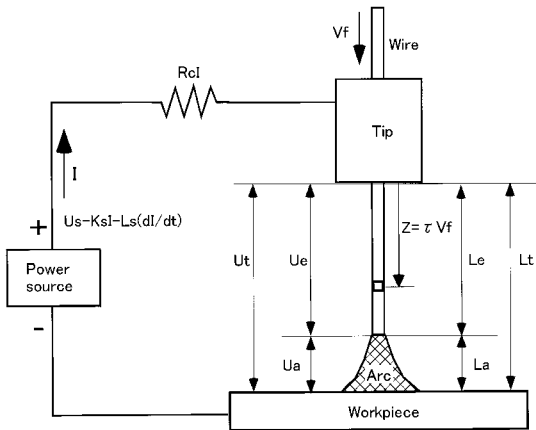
Equivalent electrical circuit for GMA welding (Ref.4)
